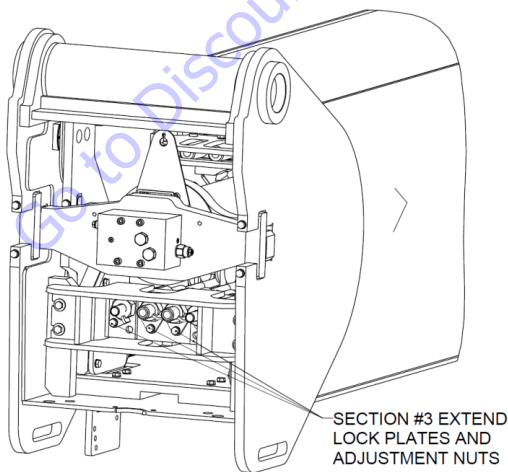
Initial Exposed Thread Length for Wire Rope Adjustment
